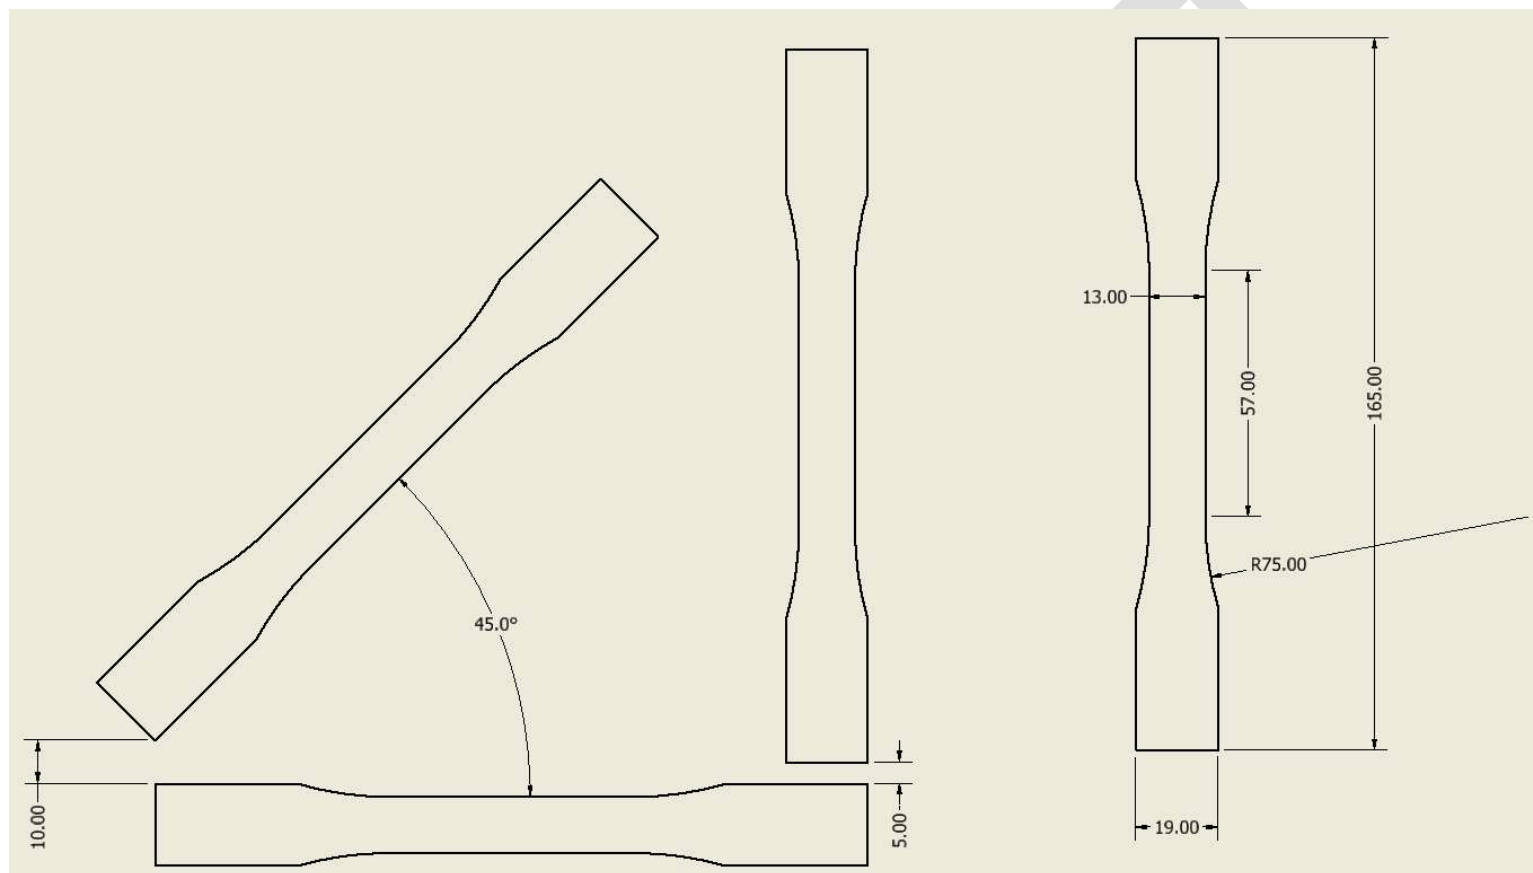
ASTM D638 Dog bone dimensions (Right) and how they were laid out (left), the structure is 3mm thick
